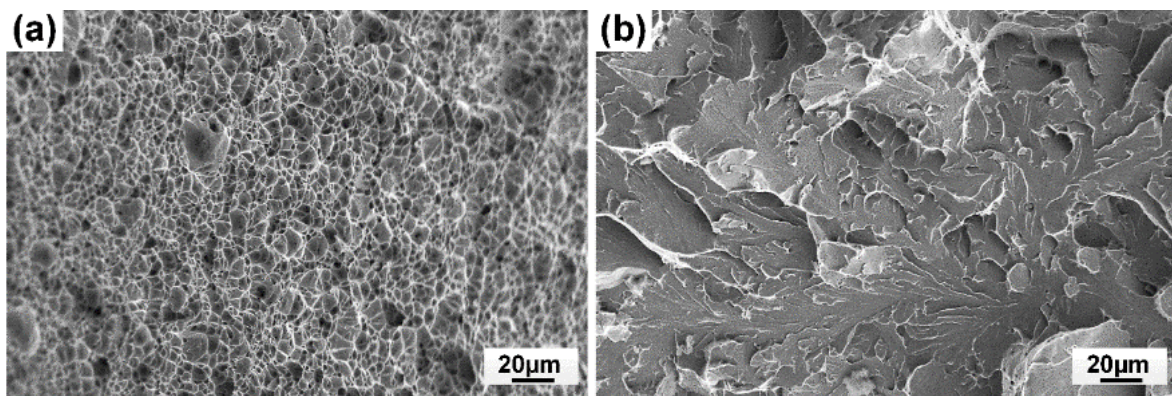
SEM images of Charpy fracture surfaces of ER70S-2-wire-fed weld samples tested at: (a) 0 °C; (b) -20 °C.
